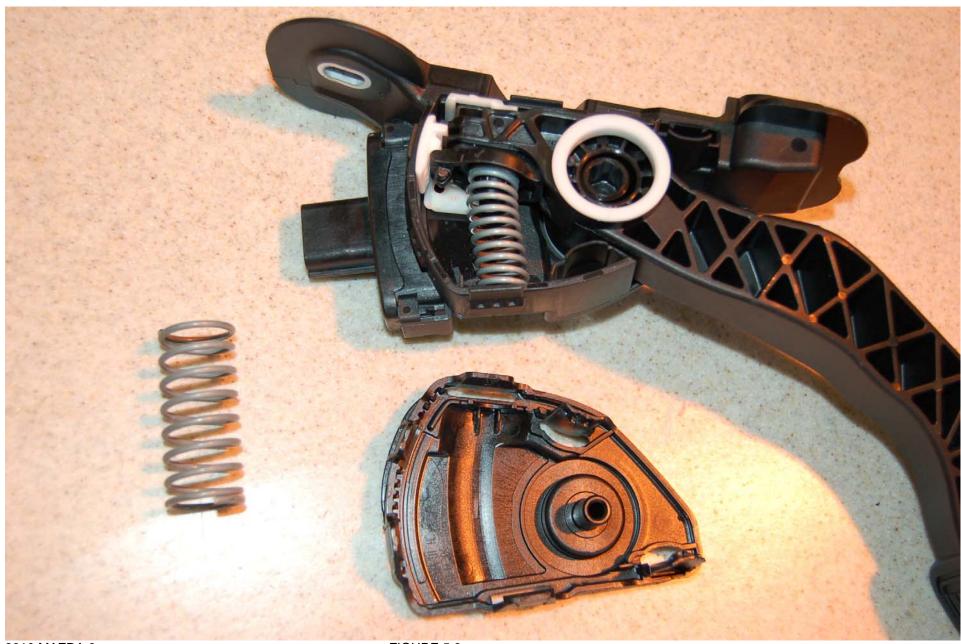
ACCELERATOR WITH SPRING 1 REMOVED
